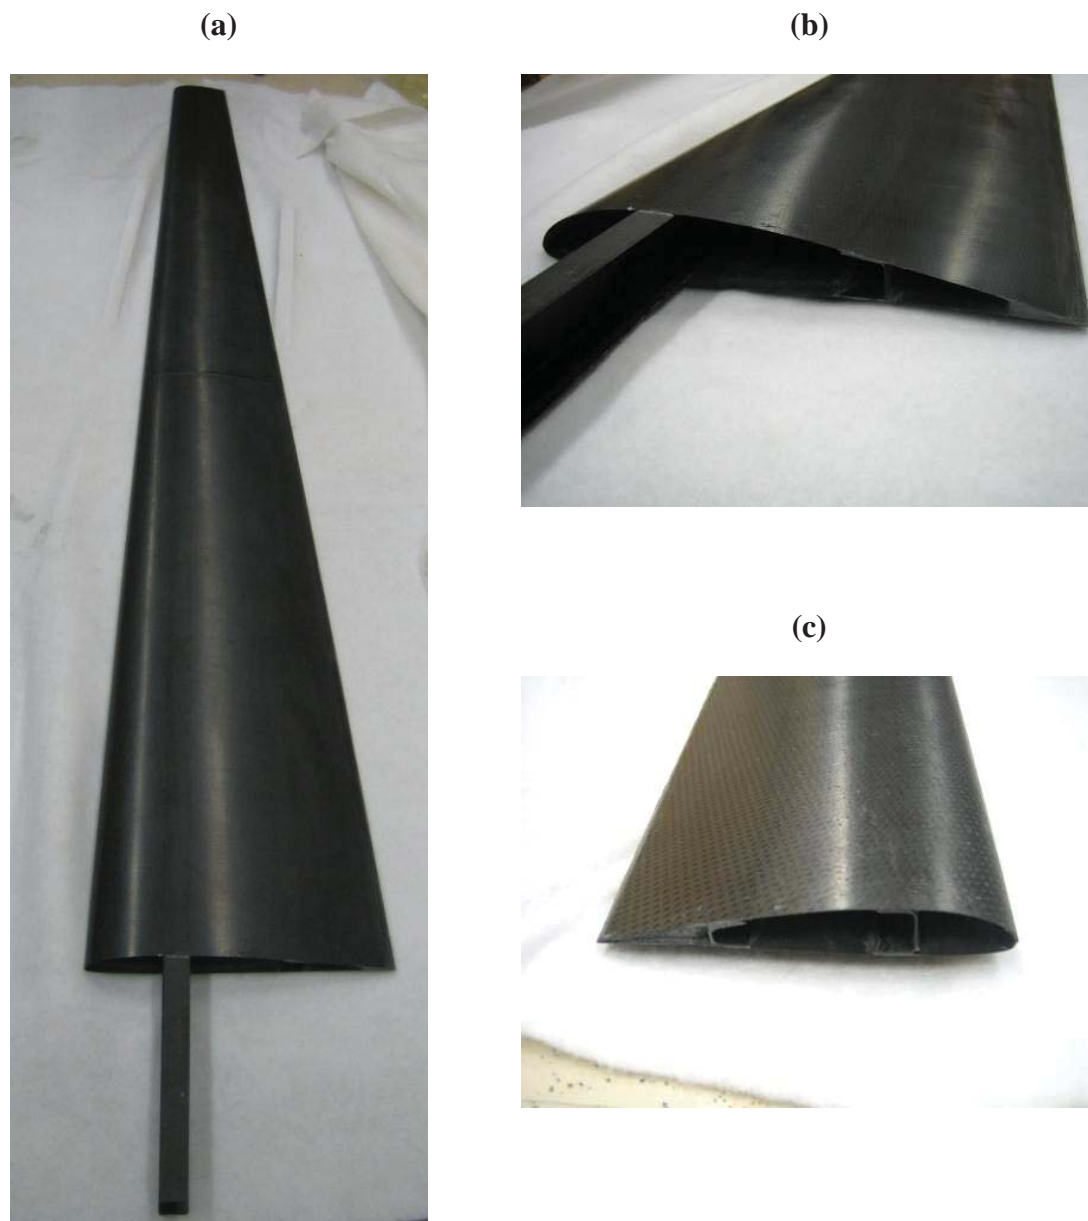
Views of the assembled test-bed wing structure: (a) entire wing (shown in perspective plan view), (b) wing root, (c) wing tip.
